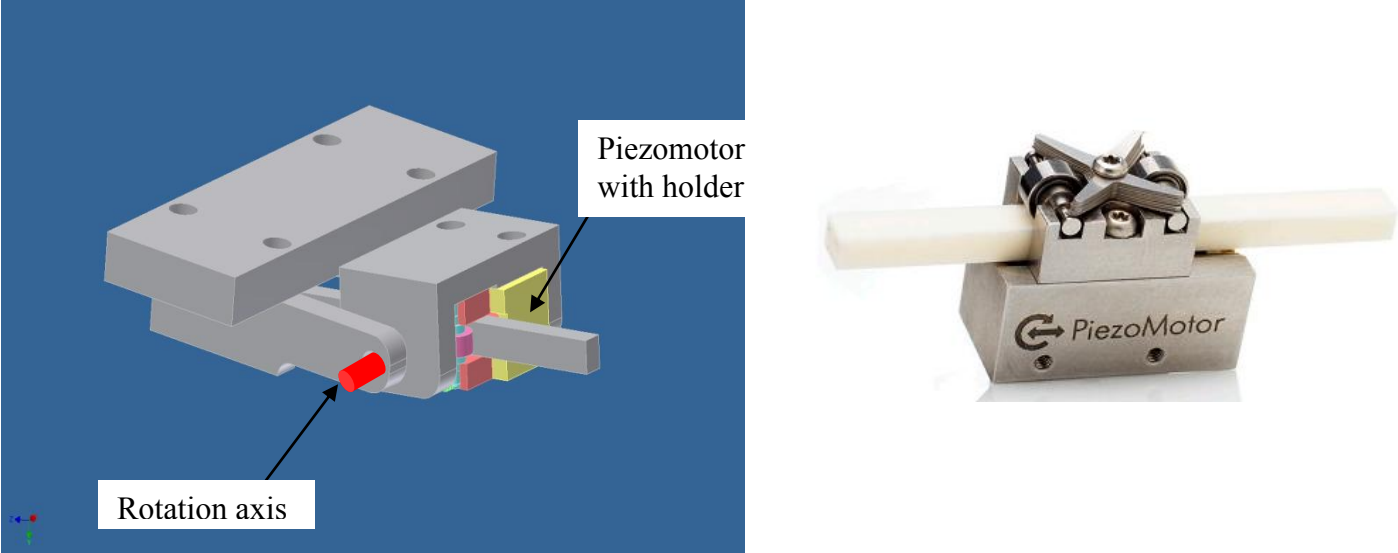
Motor holder as detail (red circle) from fig.5.18 and real motor
